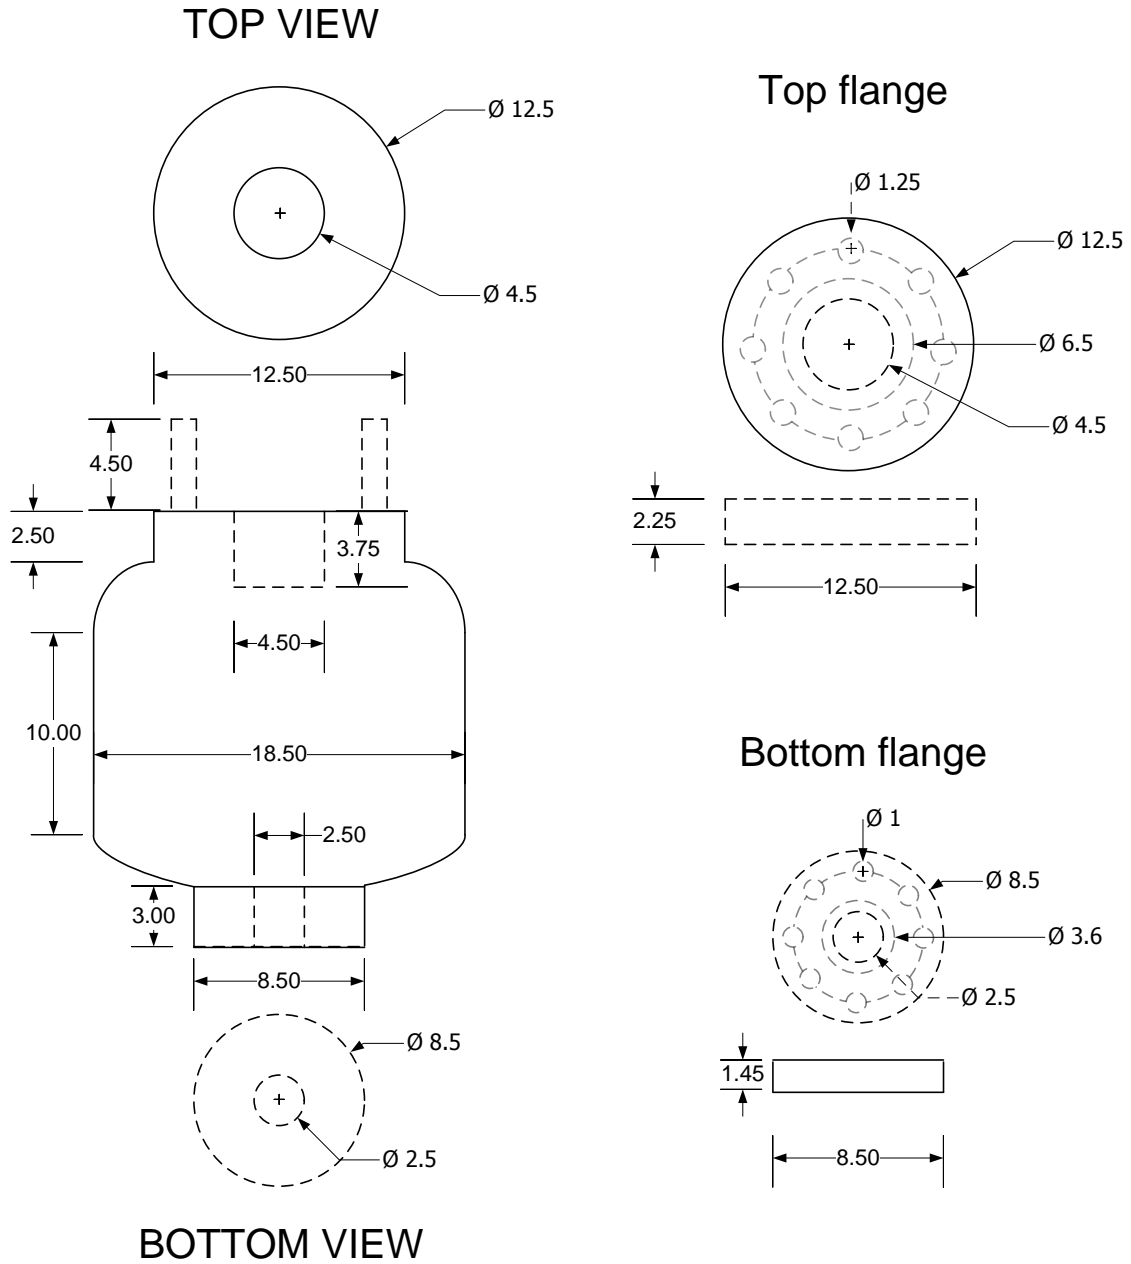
Dimensions of the 36 L Dust Explosion Equipment
